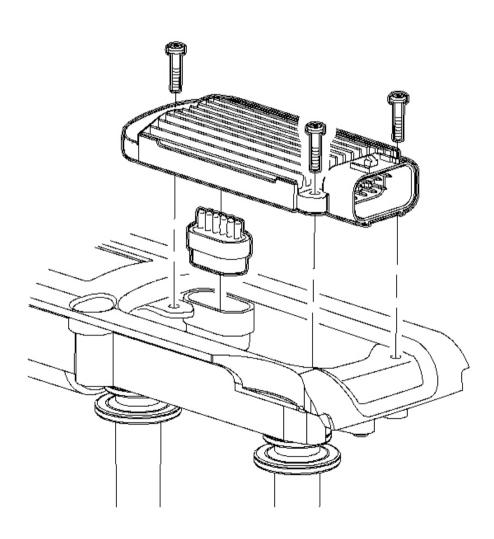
View Of El Module & Attachment Screws Courtesy of GENERAL MOTORS CORP.
